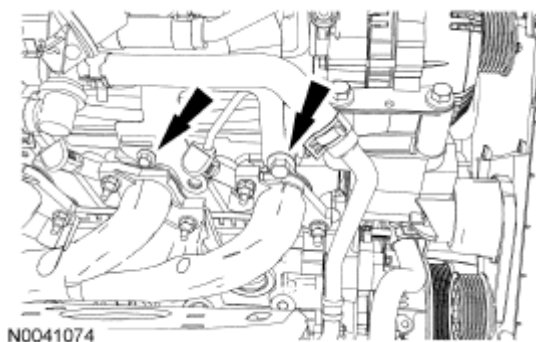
Locating Heater Hose Tube Bracket Bolts
